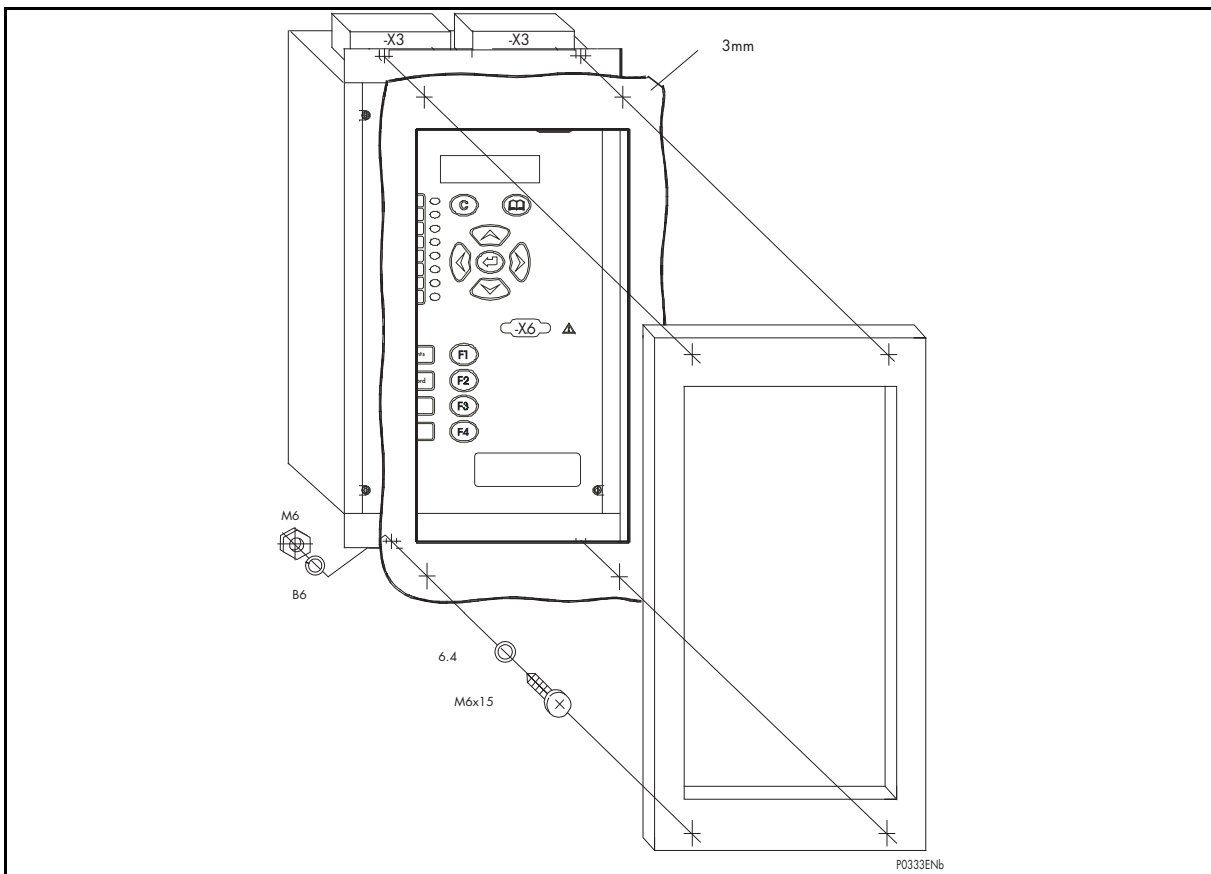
COVER FRAME SNAP-FASTENS ONTO FIXING SCREWS
